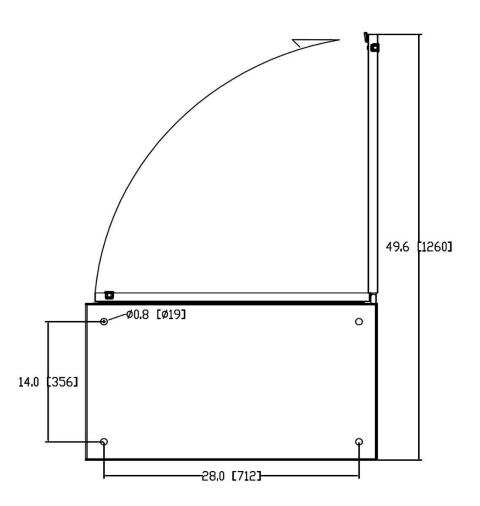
Bottom Dimensions, Customer I/O Panel (Enclosed)
